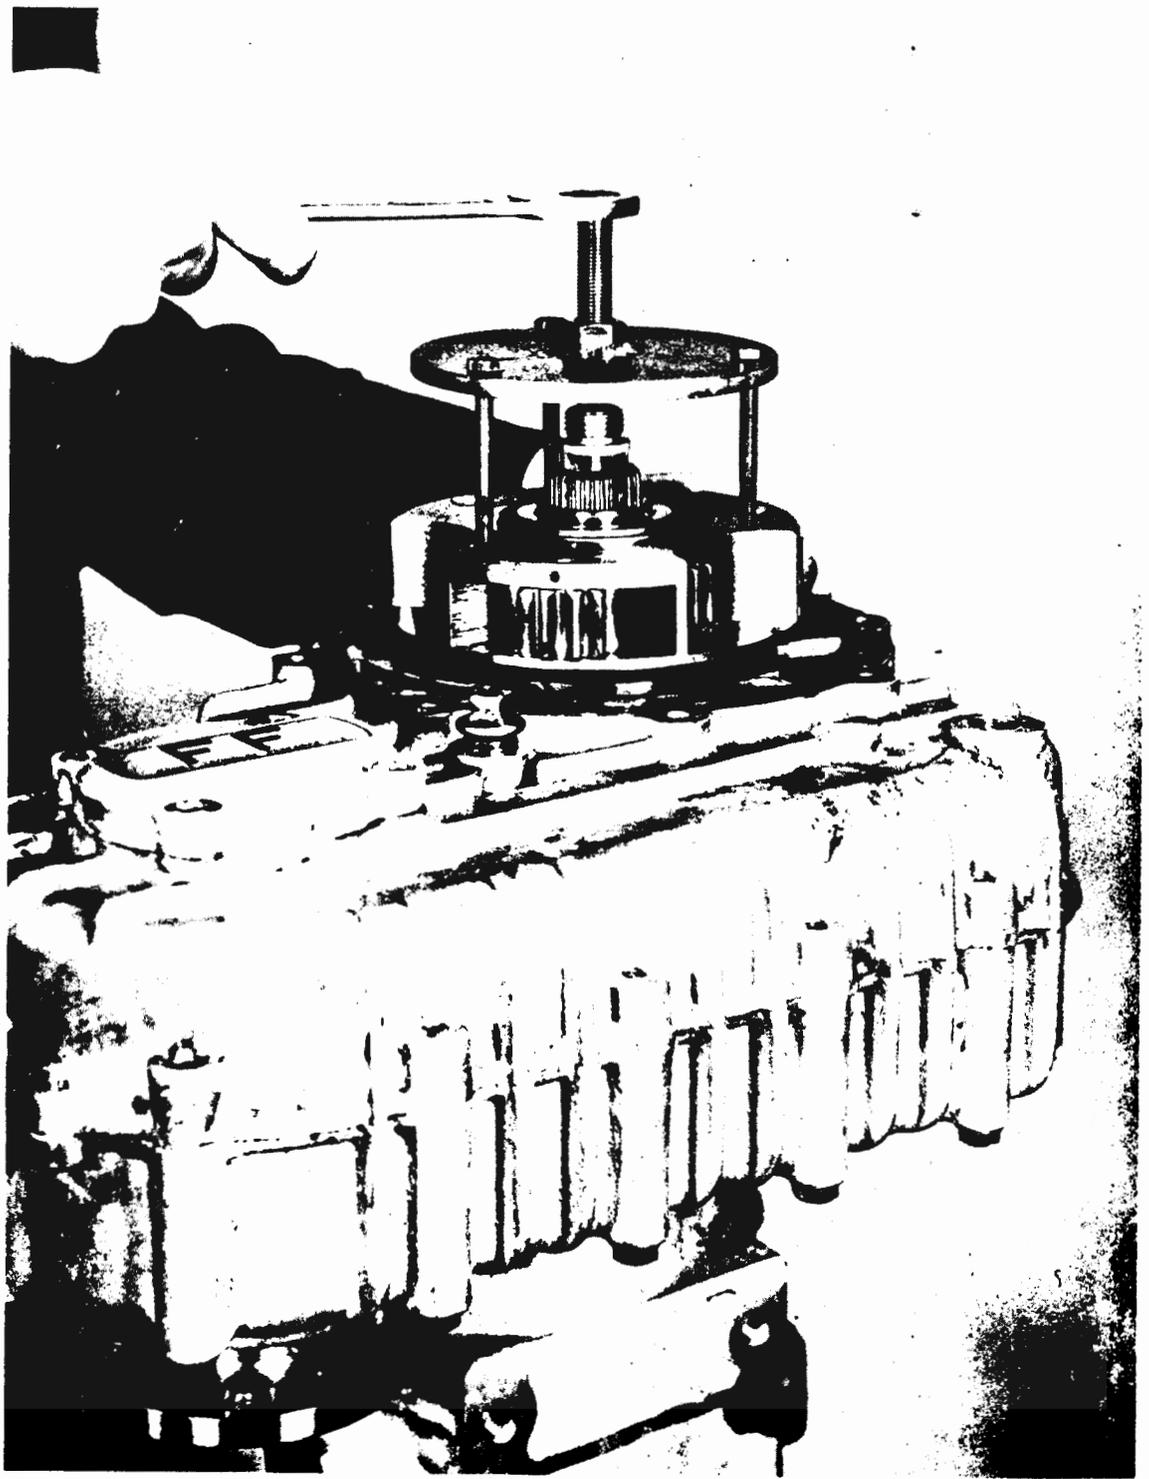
CARRIER ASSEMBLY REMOVAL.
